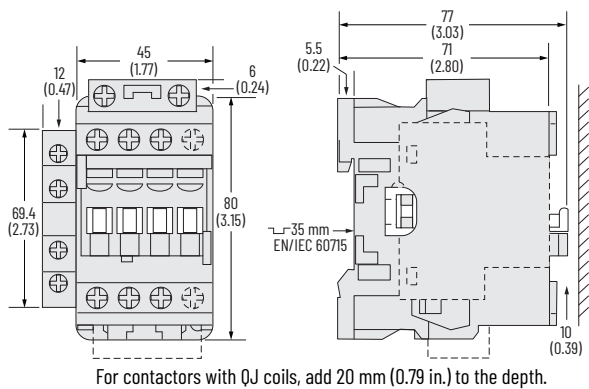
100-E09...100-E16 Contactors with Standard Coils and Side-mounted Auxiliary Contact
